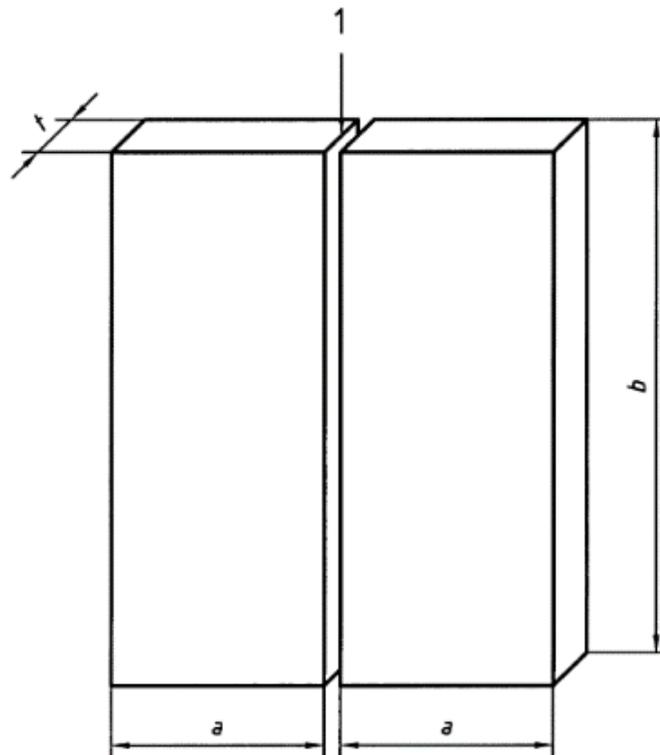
Test piece for a butt welded joint in plate with full penetration according to EN rules (SFS-EN ISO 15614-1, p. 15)
